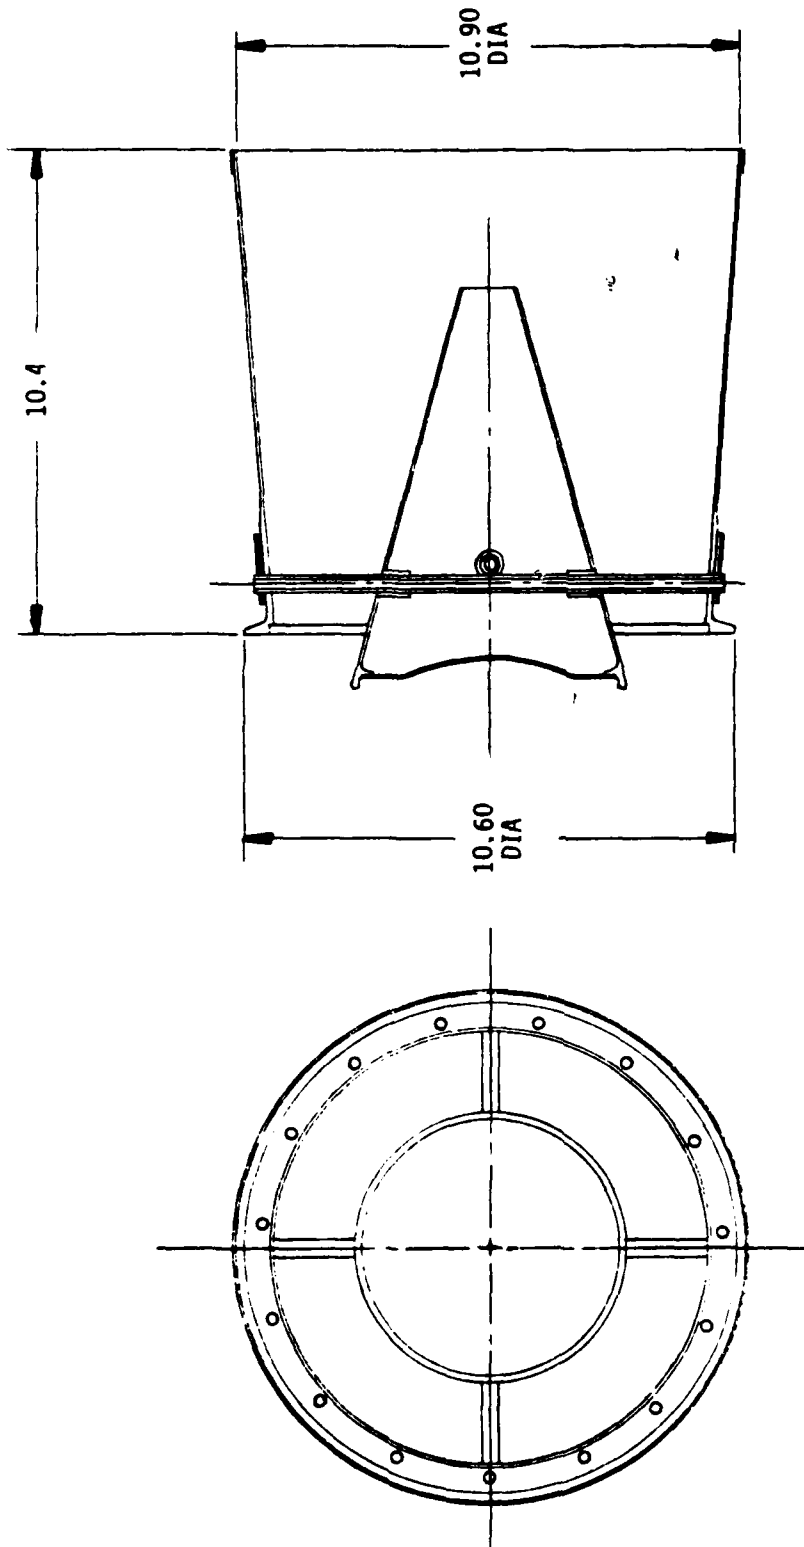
Power Turbine Containment - Combustor and Rear Bearing Support Housing.
